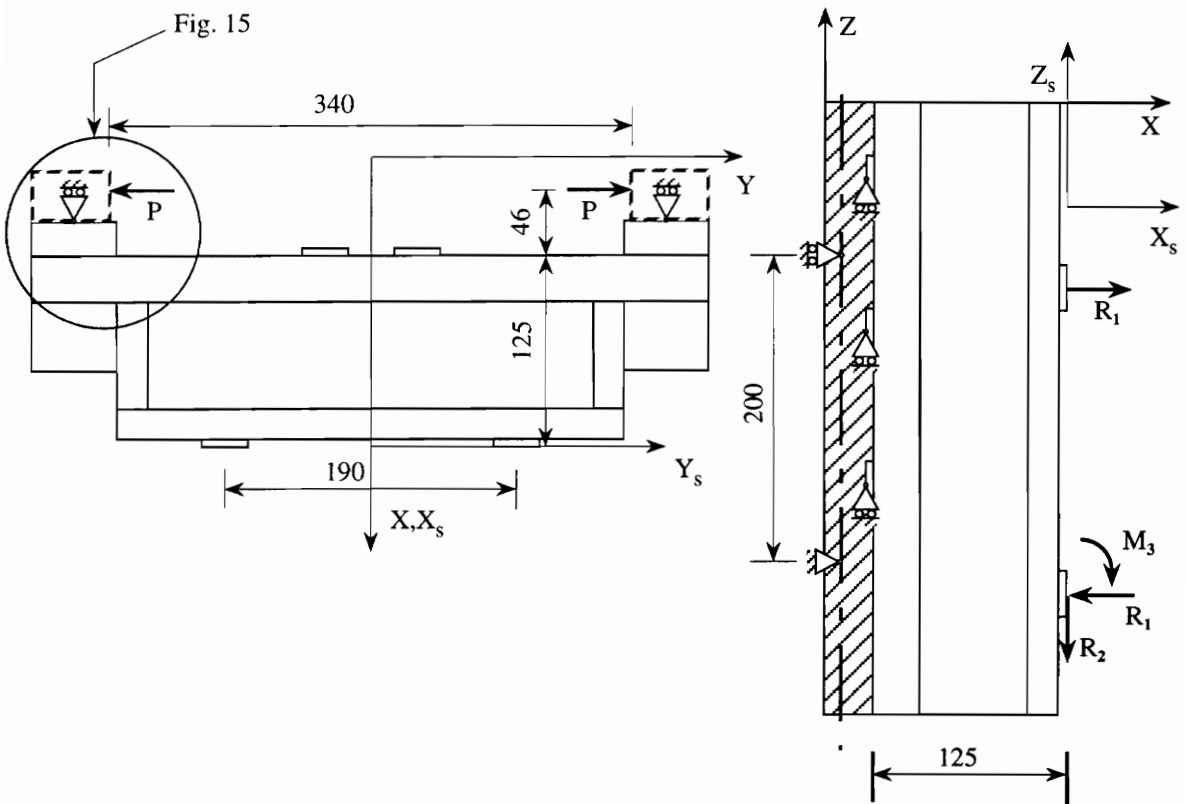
Interface geometry and loading (dimensions in mm).
